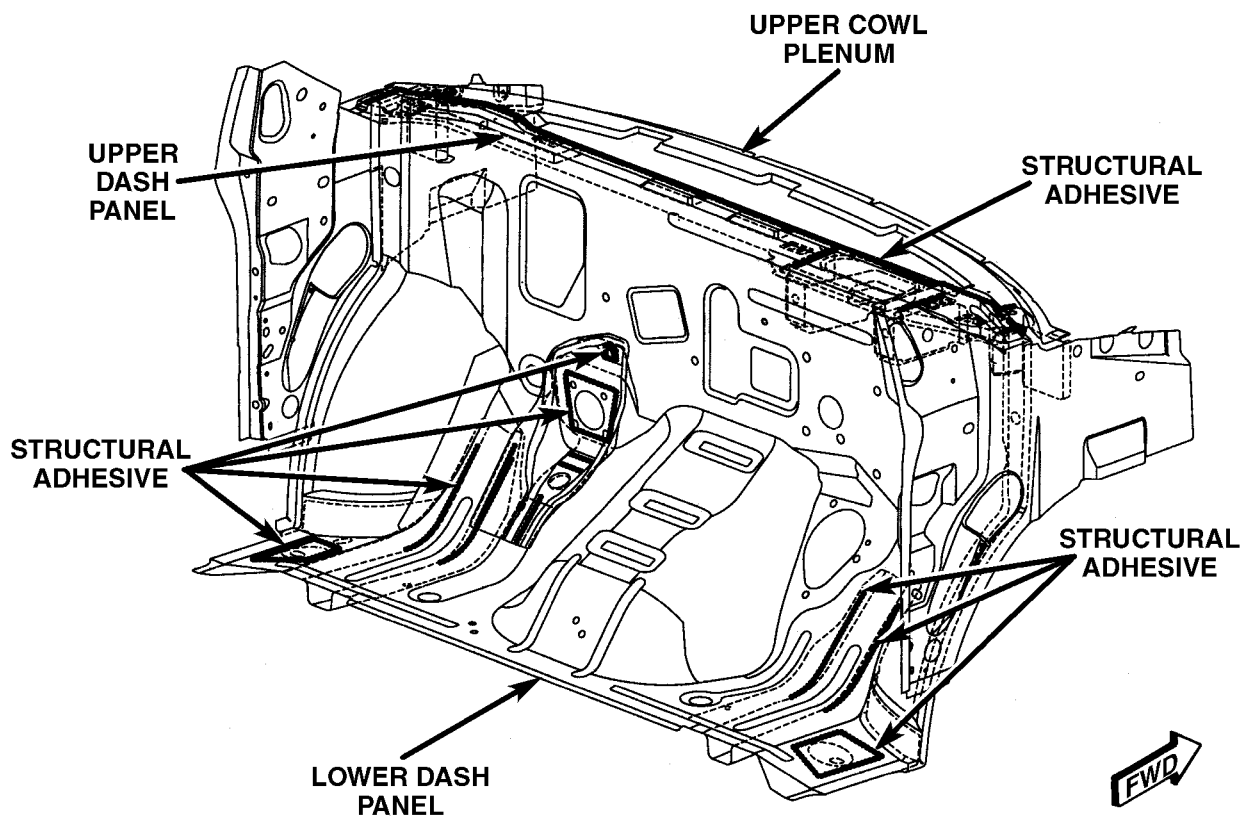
UPPER COWL PLENUM / UPPER AND LOWER DASH PANEL - RIGHT HAND DRIVE ONLY
